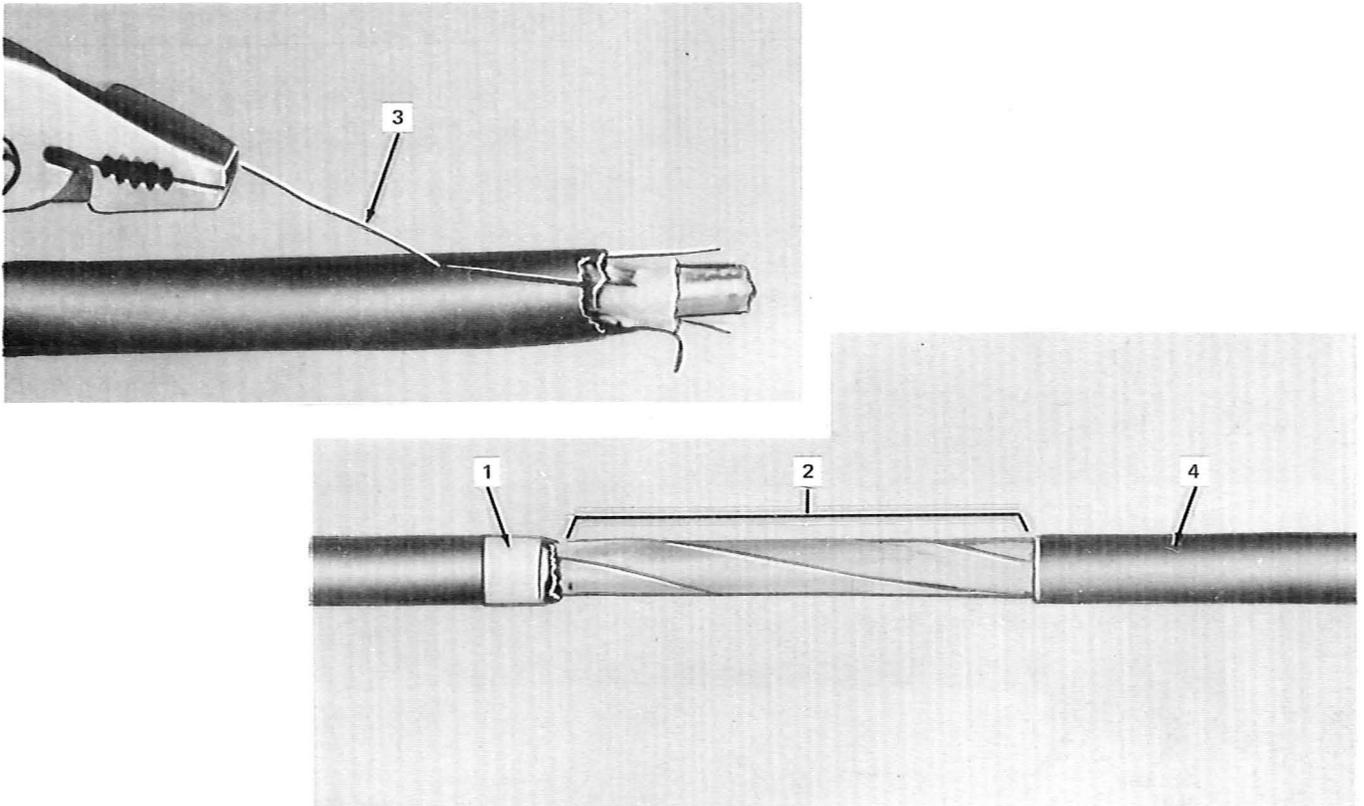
Removing Outer Sheath and Inner Layer of Wires
